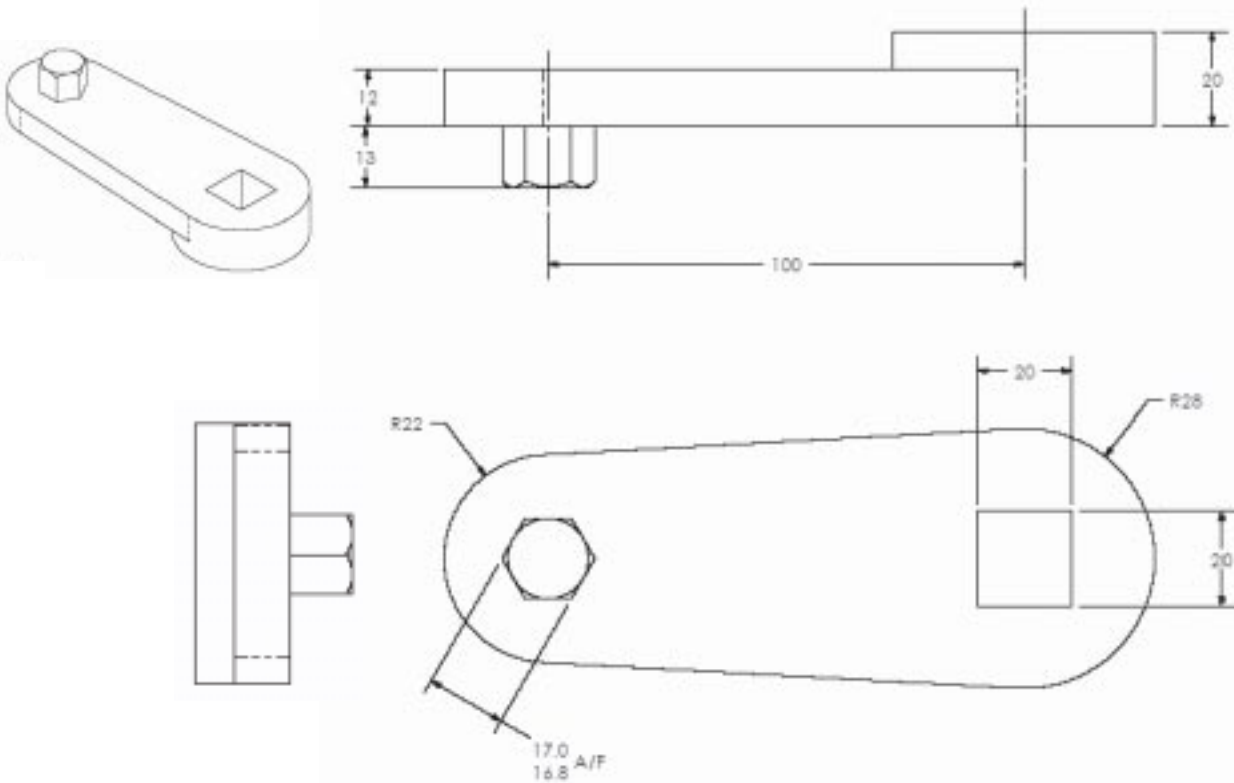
Socket Head Bolt Tightening Tool (Section 180-0020, SUSPENSION SYSTEM- FRONT SUSPENSION)
